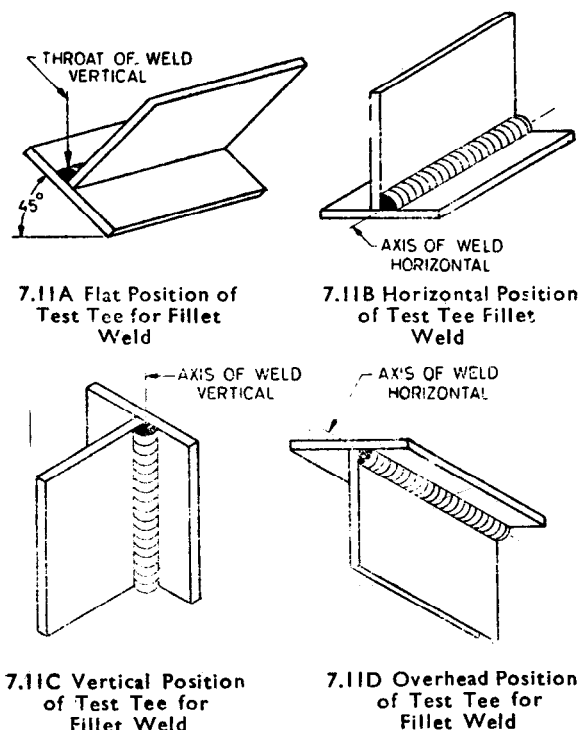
POSITIONS OF TEST PLATES FOR WELDER PERFORMANCE QUALIFICATION OF FILLET WELDS
